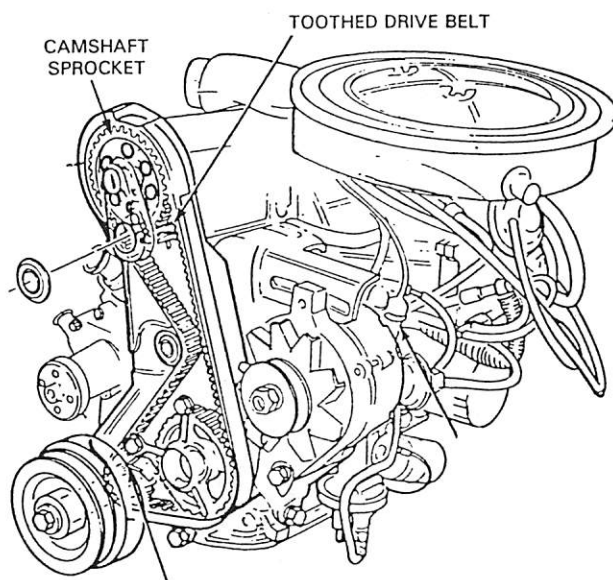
Overhead camshaft driven by a toothed drive belt. (Ford)
